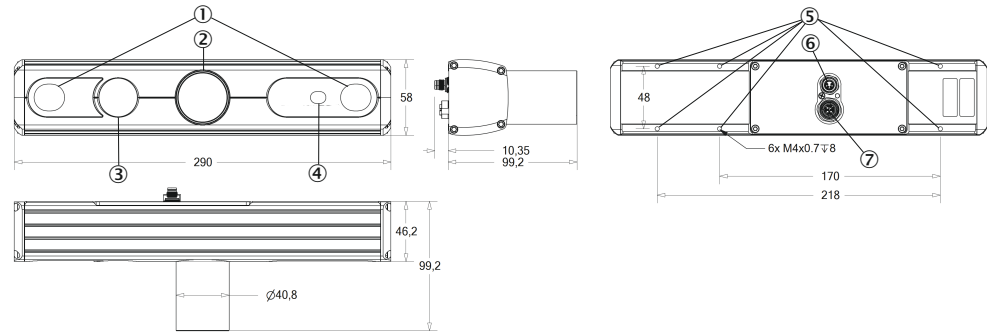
Ensensio C57 (PLB522) camera dimensional drawing (not true-to-scale)
